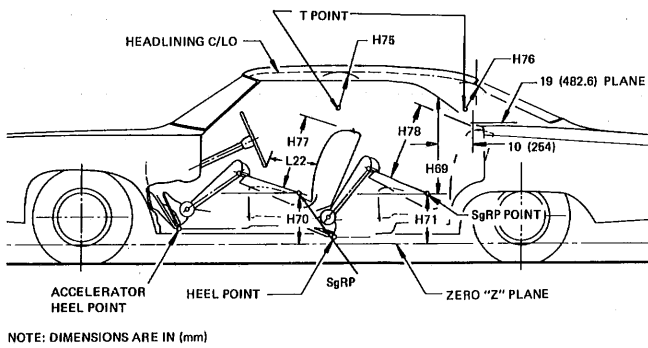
INTERIOR DIMENSIONS, HEIGHT
